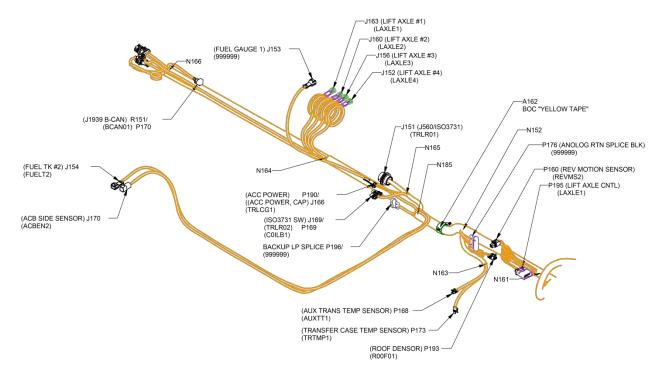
Chassis Harness From Cab Mount to BOC
